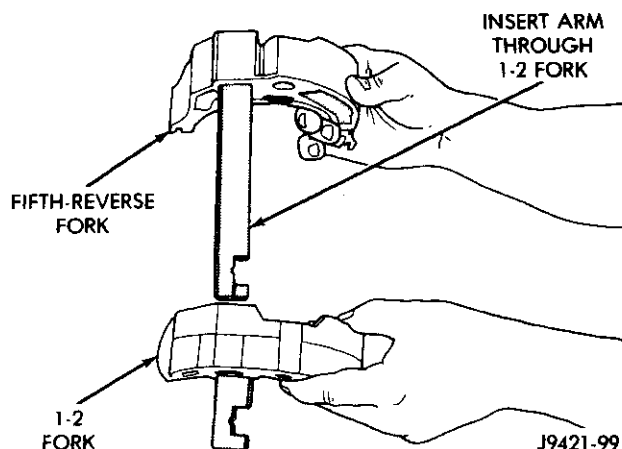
Assembling 1-2 And Fifth-Reverse Shift Forks
